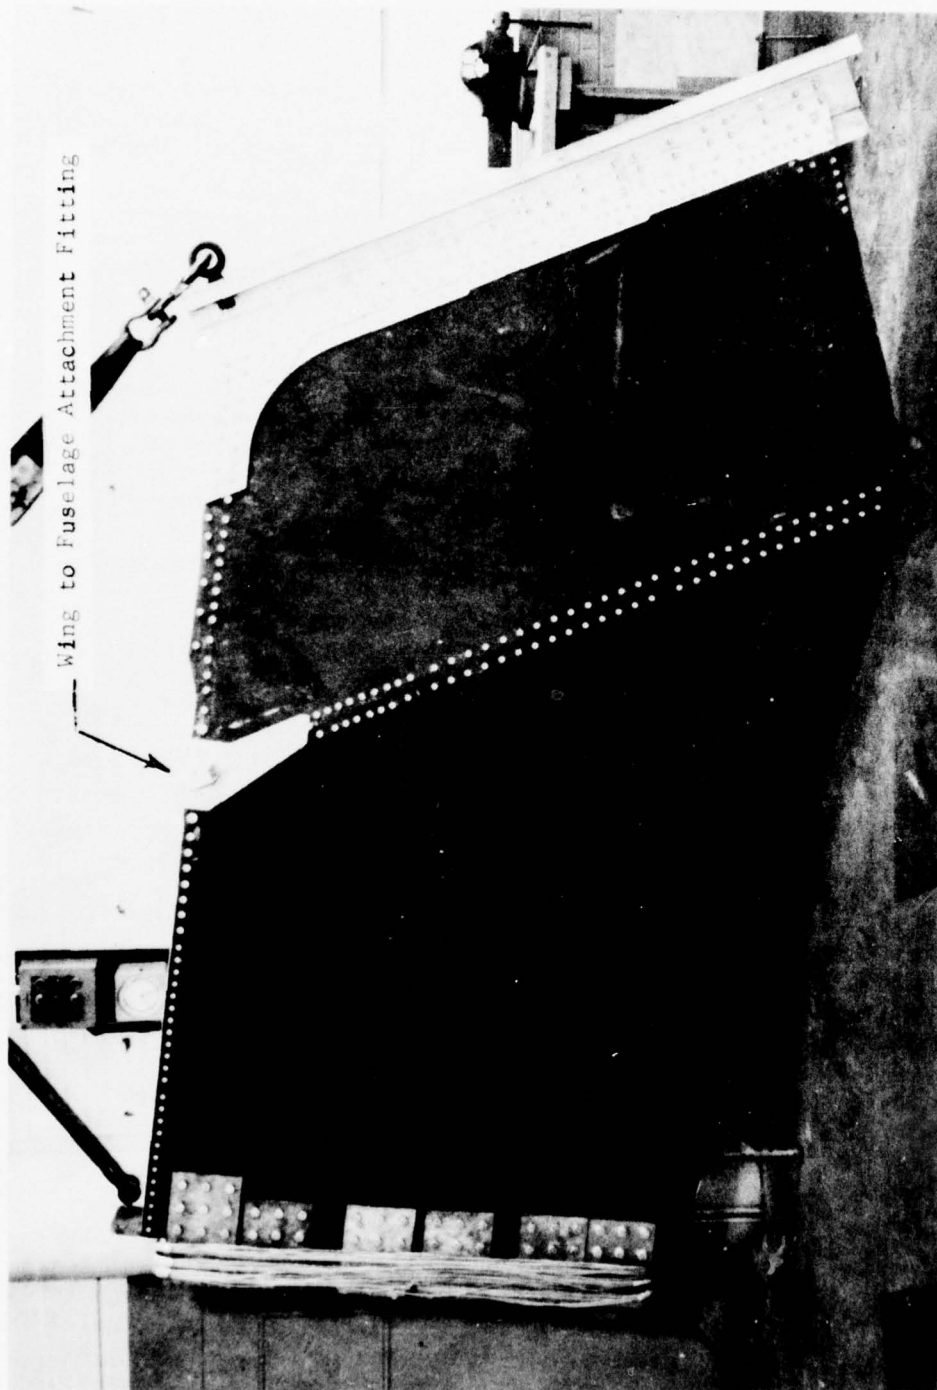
COMPOSITE WING BOX ASSEMBLY - BOTTOM VIEW
